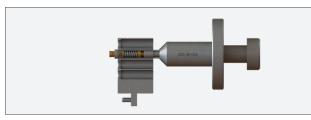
Contact Removed. Uses Tool PN 500-38-006.
